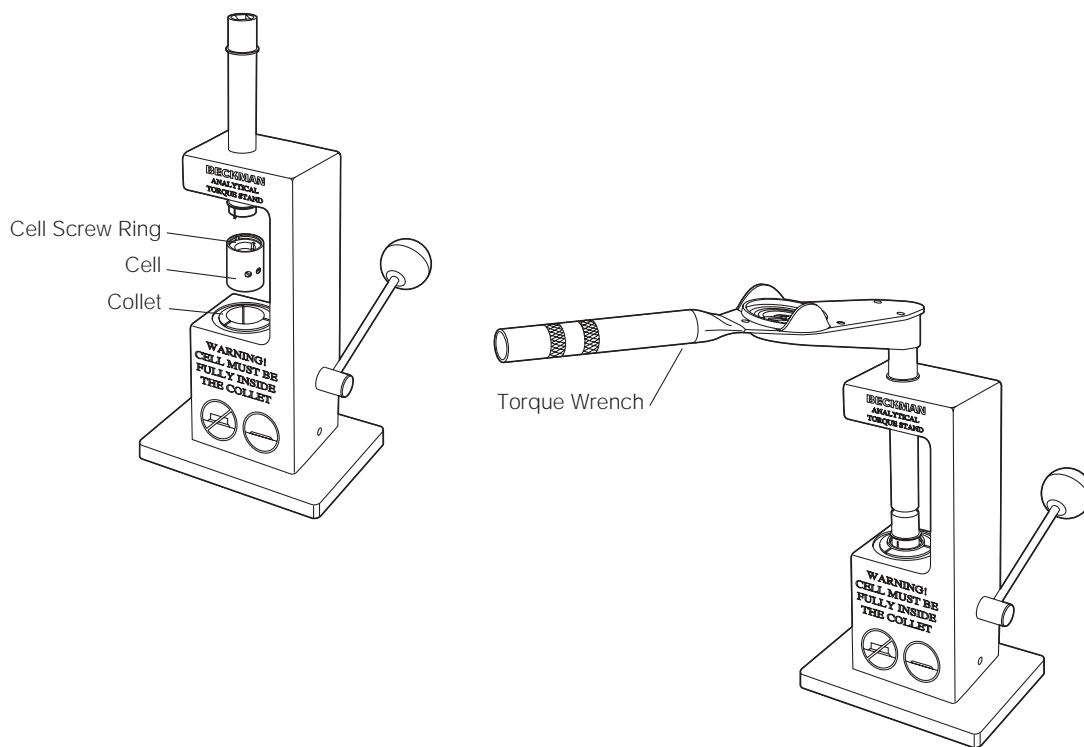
Insert Cell Into the Torque Stand Collet and Check Screw Ring Tightness
